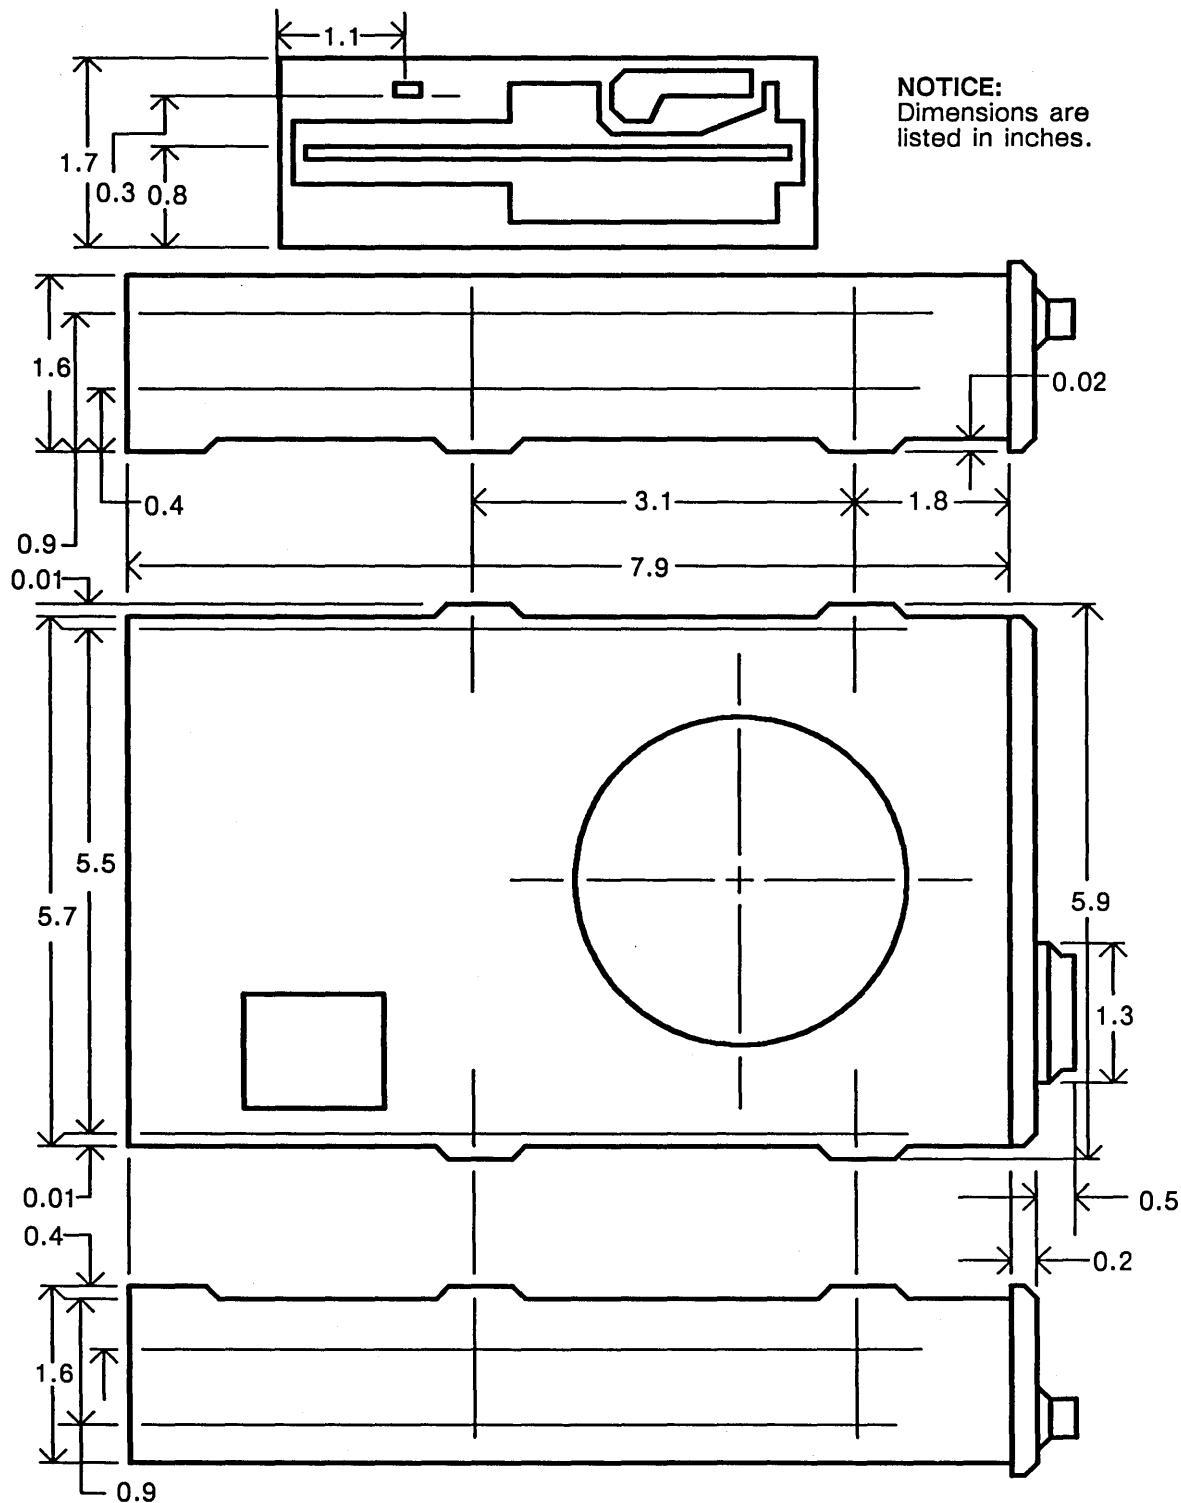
Floppy Disk Drive Exterior Dimensions
